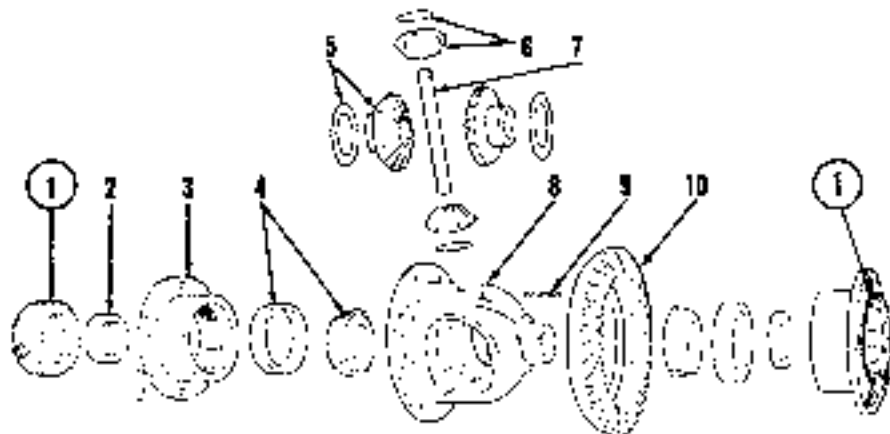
Pony differential assembly. Bevel ring gear is retained to differential case by cup screws. Adjusting nuts (3) control pre-load on differential bearings and backlash (.006-.008) of main drive bevel gears.
